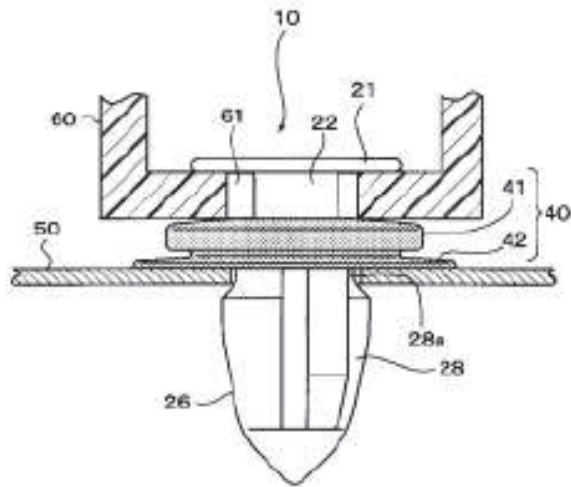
shows member to be attached 60 and panel 50 connected to one another using resin clip 10. Ex. 1008 ¶ 55. Figure 6 also depicts head part 21 of resin clip 10 engaging hole 61 of member 60 and leg part 26 of resin clip 10 inserted through a locking hole in panel 50. *Id.* at ¶¶ 51, 52, 55. As member 60 approaches panel 50, the lower surface of skirt part 42 of sealing pad 40 contacts the top of panel 50 and extends outwardly such that it “is closely sealed to the surface” of panel 50. *Id.* at ¶¶ 52, 54.
